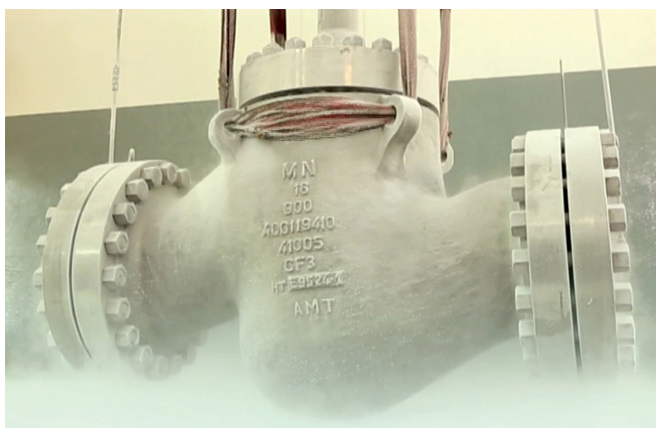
16 in. cryogenic globe valve used for coldbox valve applications.
